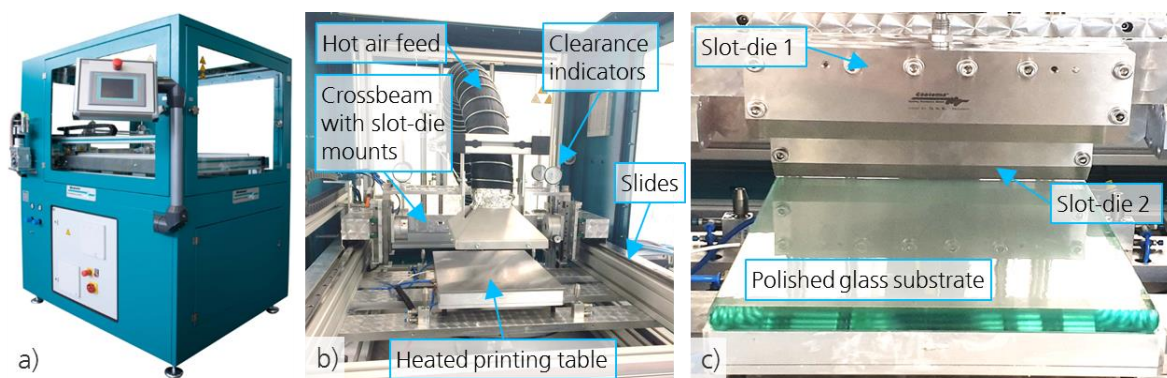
Discontinuous coating machine Easycoater EC63. a) Exterior view (©Coatema). b) Interior of vacuum-extractable printing cabin (©Coatema). c) Slot-die arrangement and printing table setup (Neuhaus, IFF 2019).
